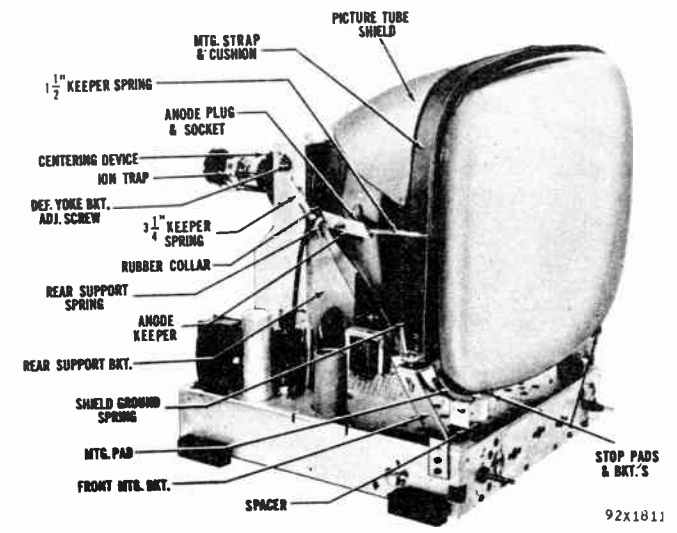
B. 20 or 21" Glass Pix Tube Mounting
